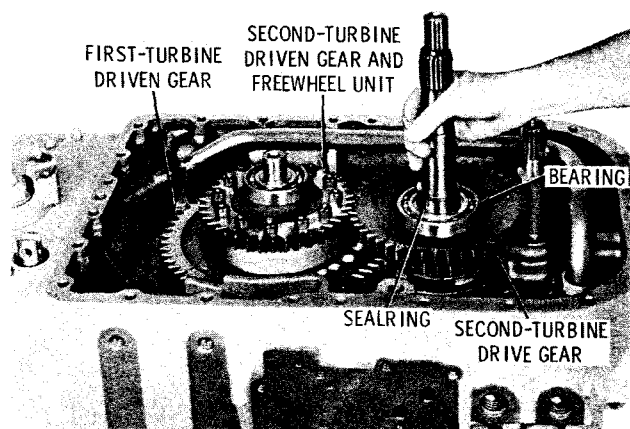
Removing second-turbine drive gear, turbine driven gears, and freewheel unit
